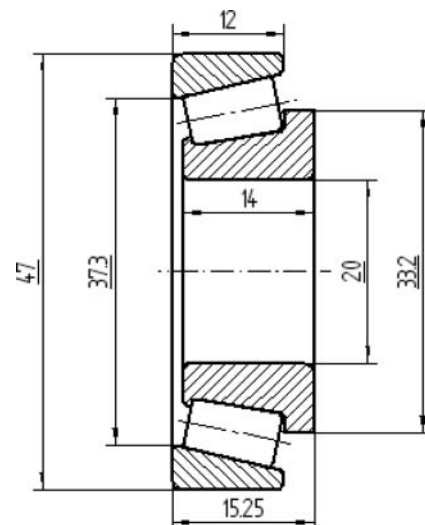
Optimum design drawing of a typical tapered roller bearing 30204 (all dimensions in mm).
